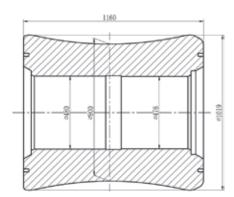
The drawing of the world's biggest roll for straightening steel pipe mill
